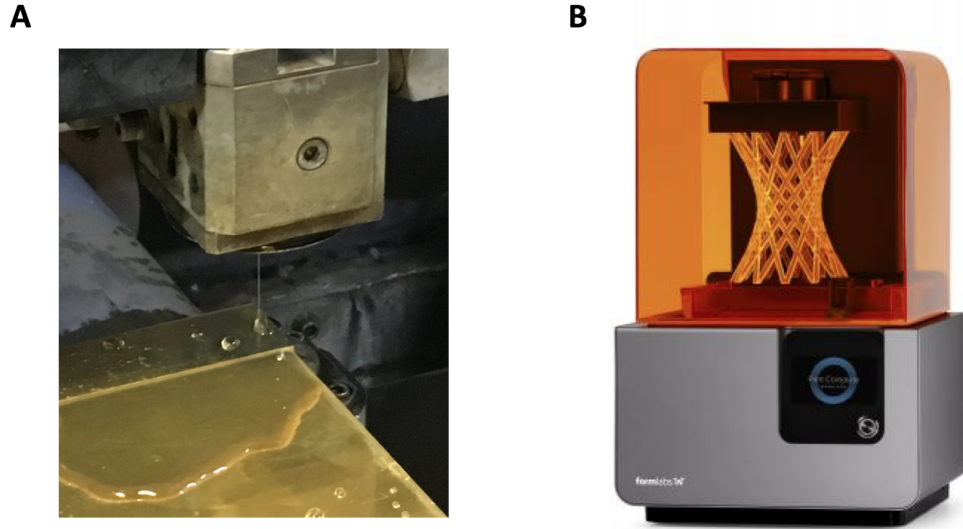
A) Electrical discharge machining (EDM) of brass to fabricate metallic connectors and B) Form 2 3D printer by Formlabs
